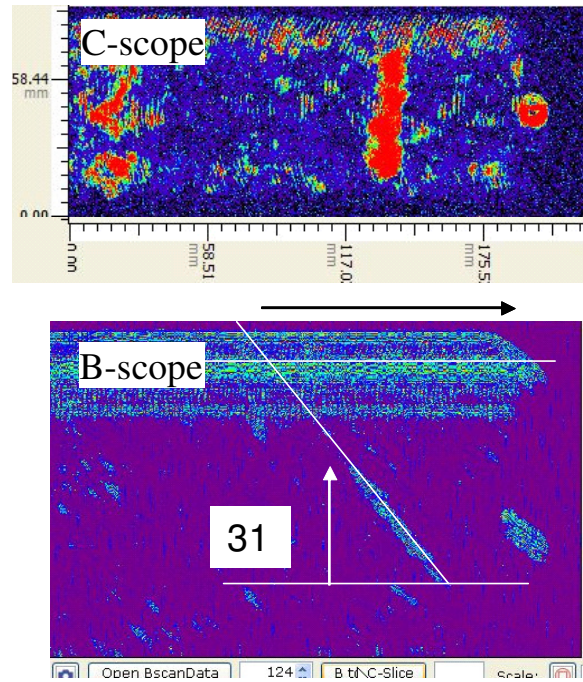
Scan image of fatigue crack 50%t in the cast stainless steel specimen
